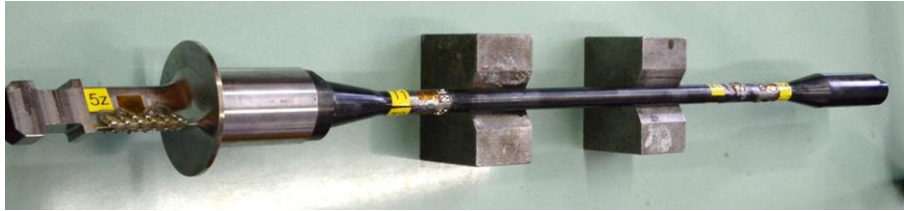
Loading bar and turbine blade assembly with installed strain gauges
